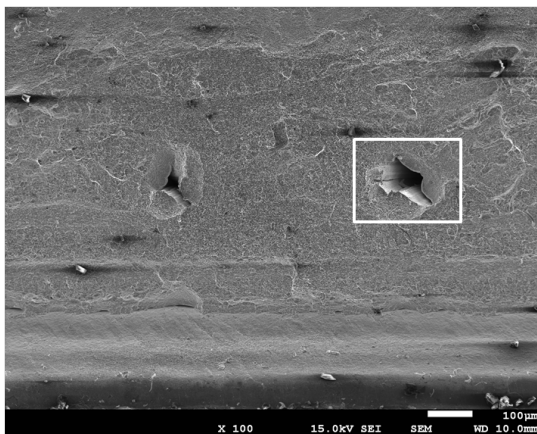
Fractured tensile specimen of a low heat input weld
